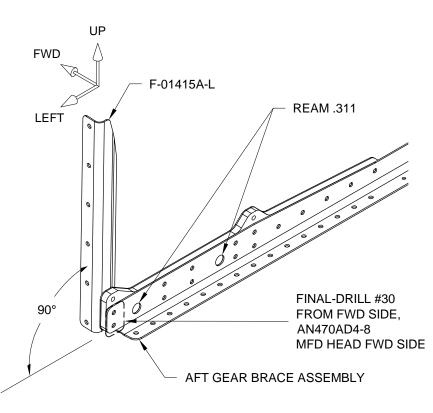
FINAL GEAR BRACE ASSEMBLY
